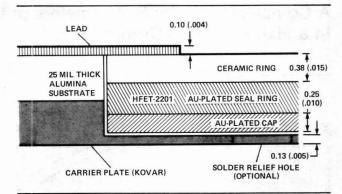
Cross-Sectional Drawing of Alumina Mounting.
